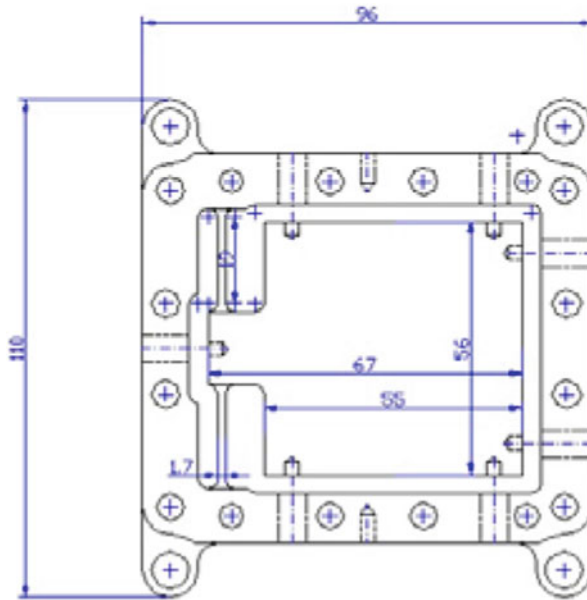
Dimensions of the new ISA mechanical oscillator prototype
